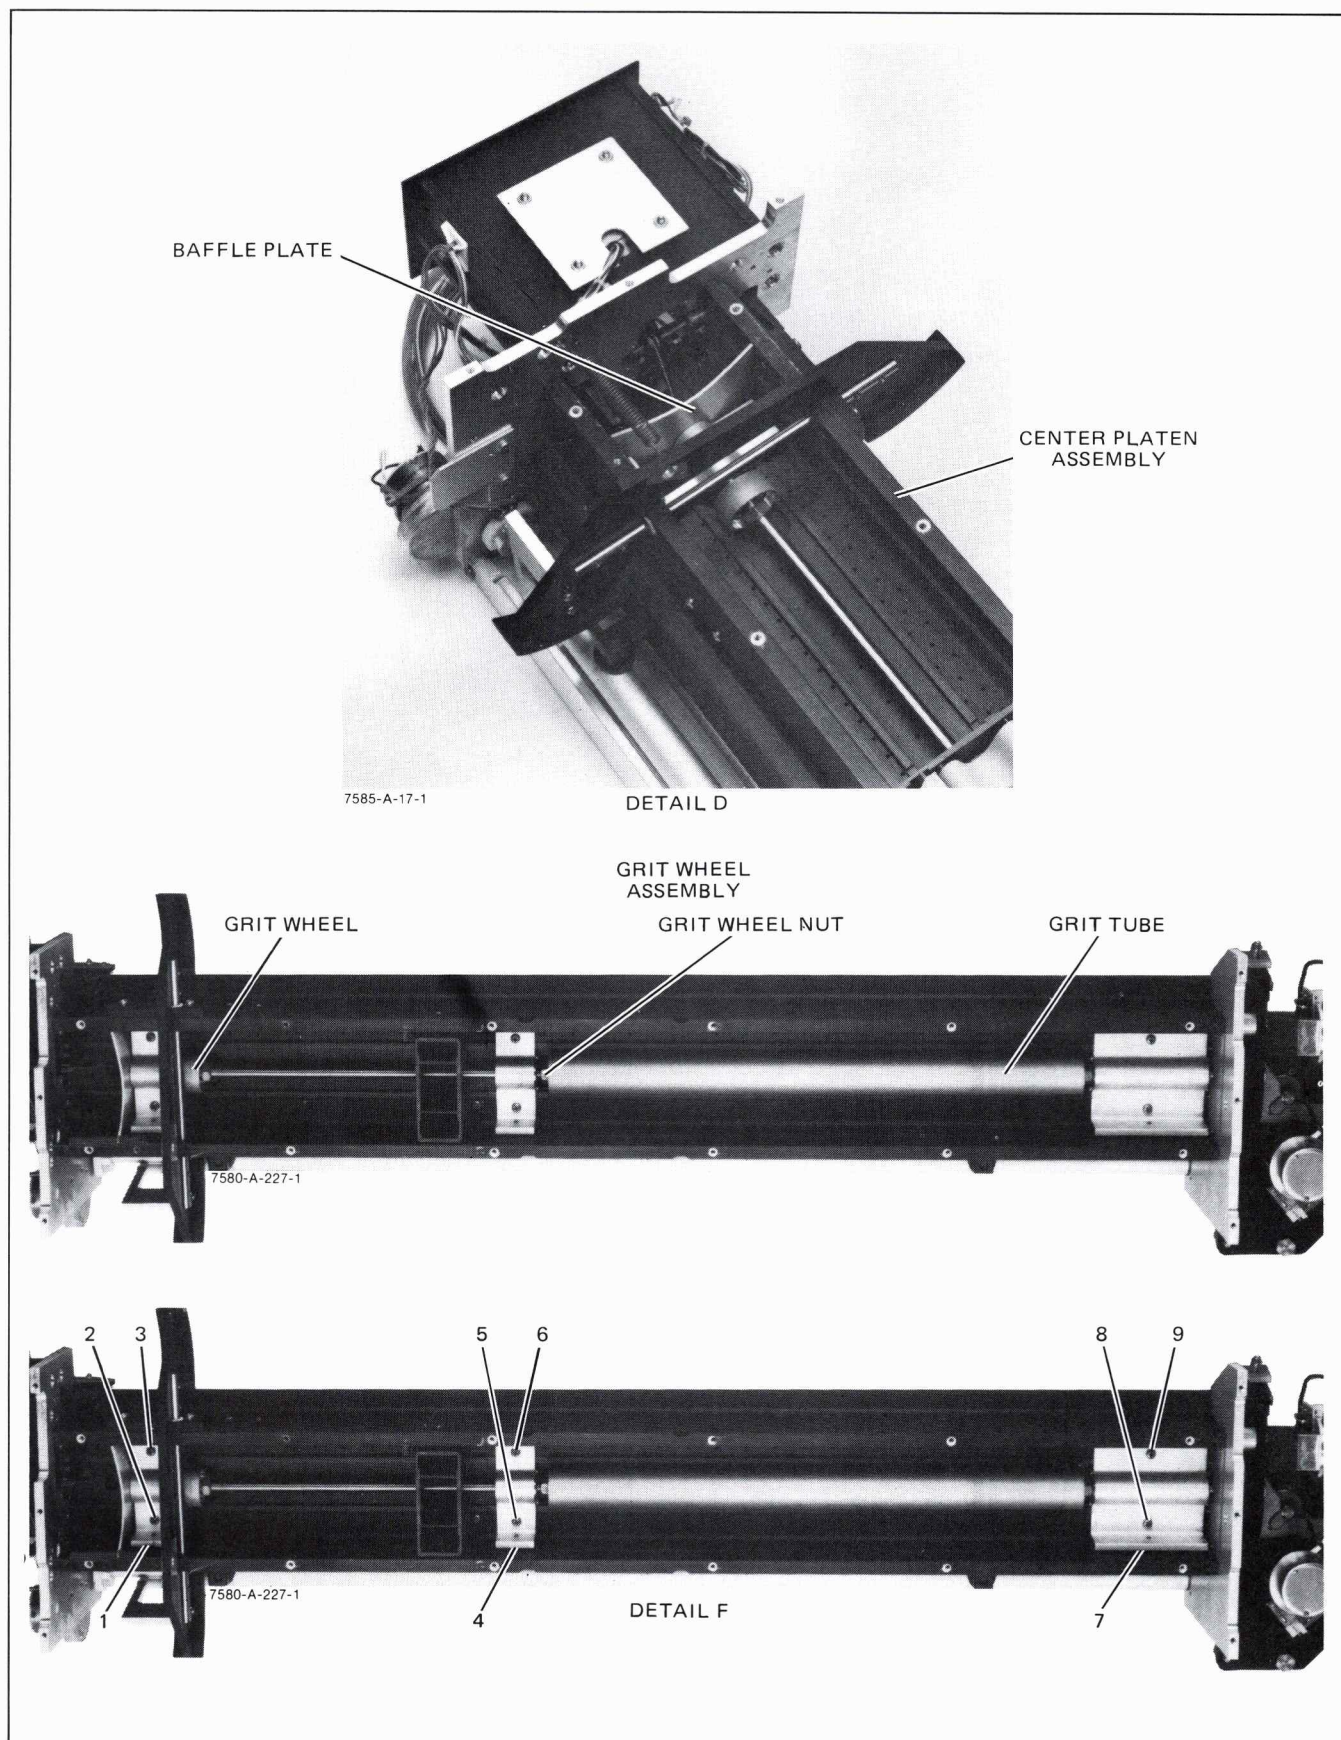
Grit Wheel Replacement (Sheet 2 of 2)
